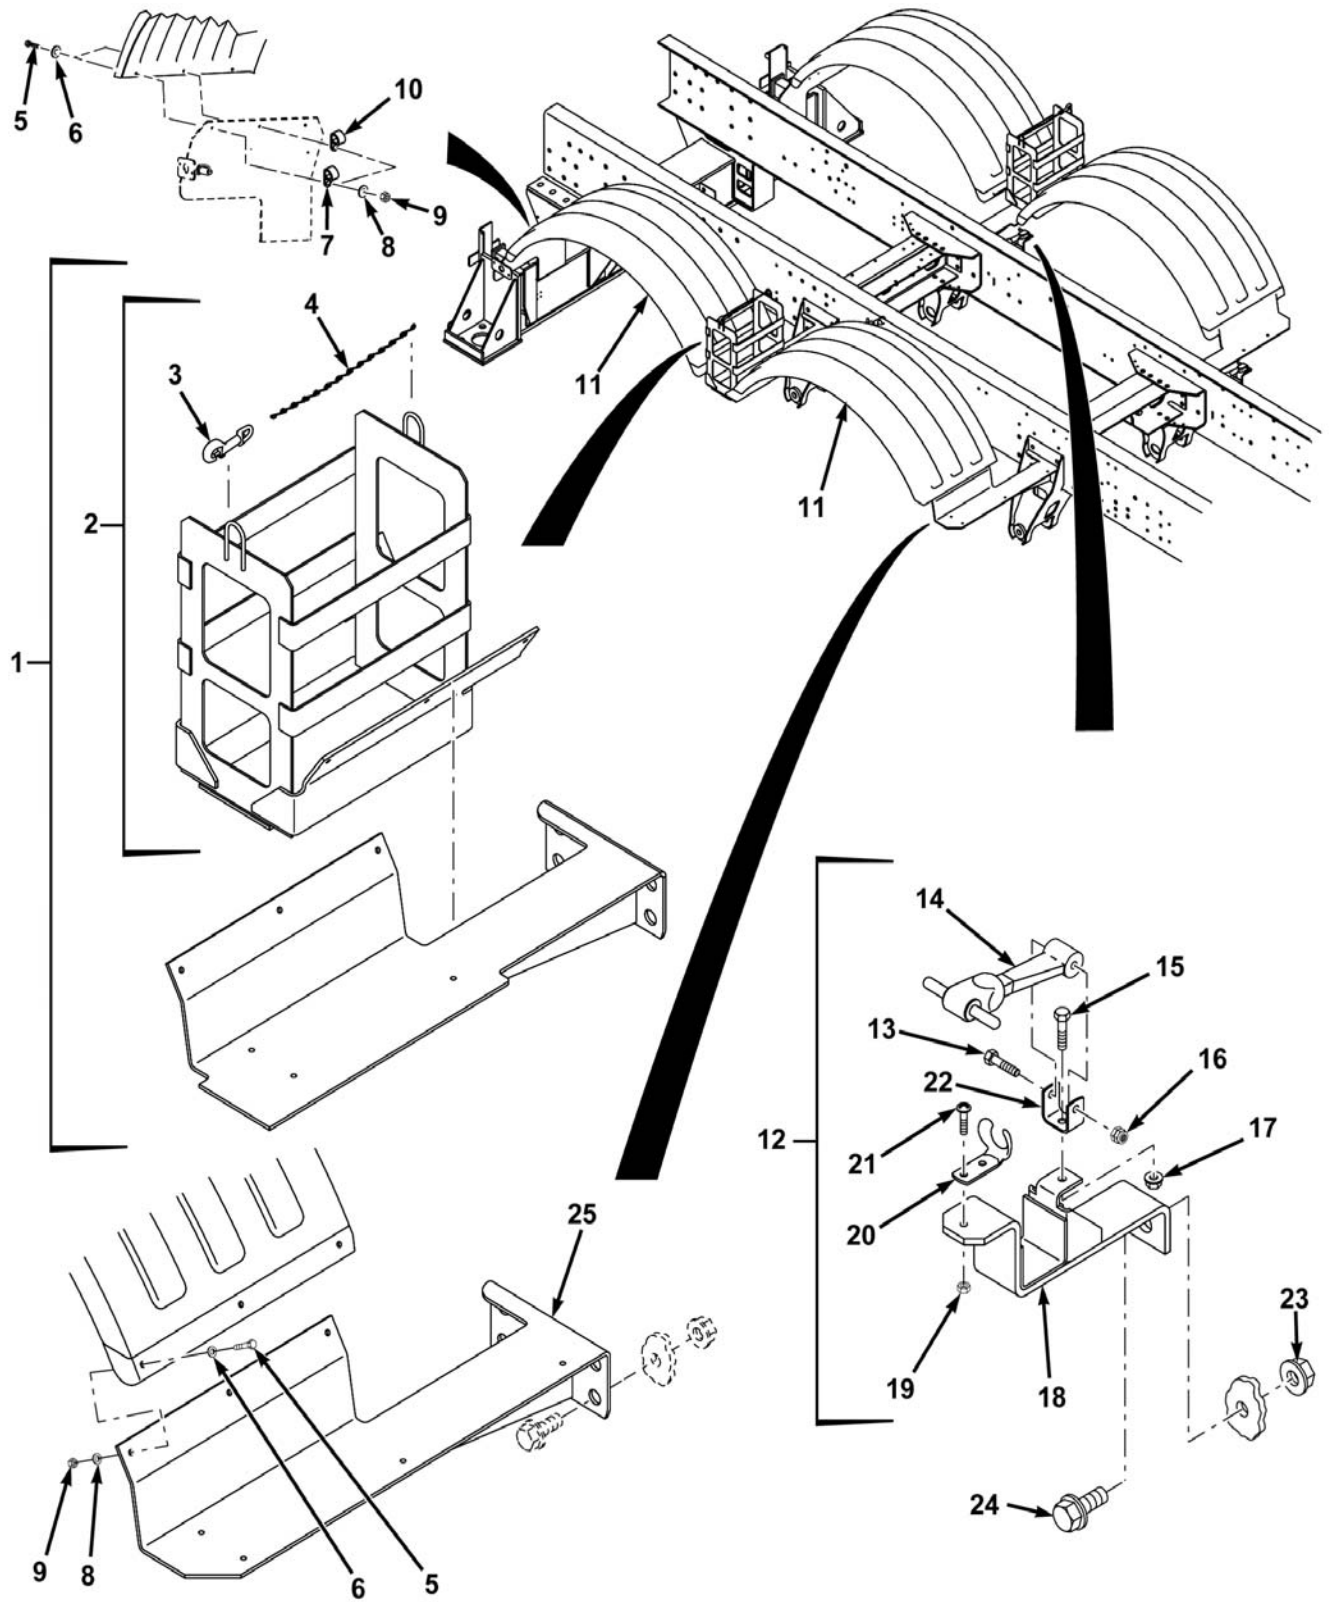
REAR SHEETMETAL ASSEMBLY (SHEET 1 OF 2)
